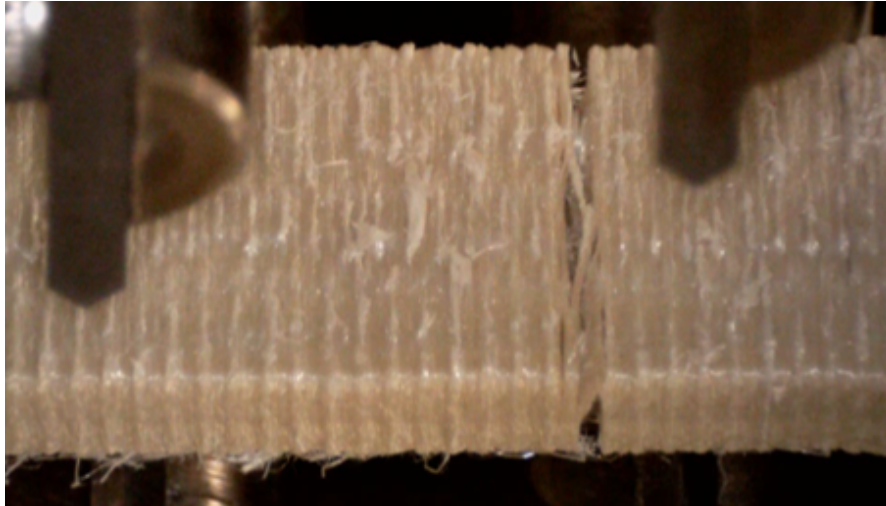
Example of fracture in a D001 specimen (short ABA) tested with the Zwick setup.
